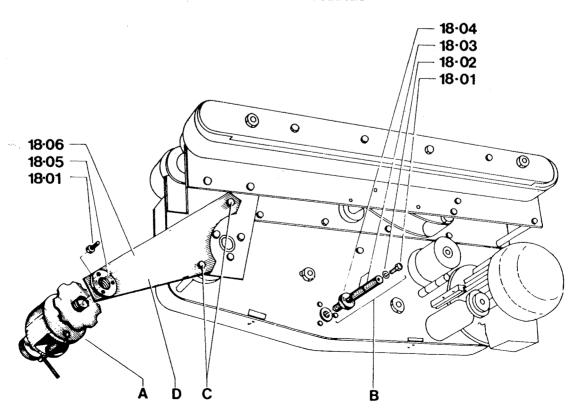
AUXILIARY TAPE ROLL MOUNT INSTALLATION - LEFT SIDE VIEW
